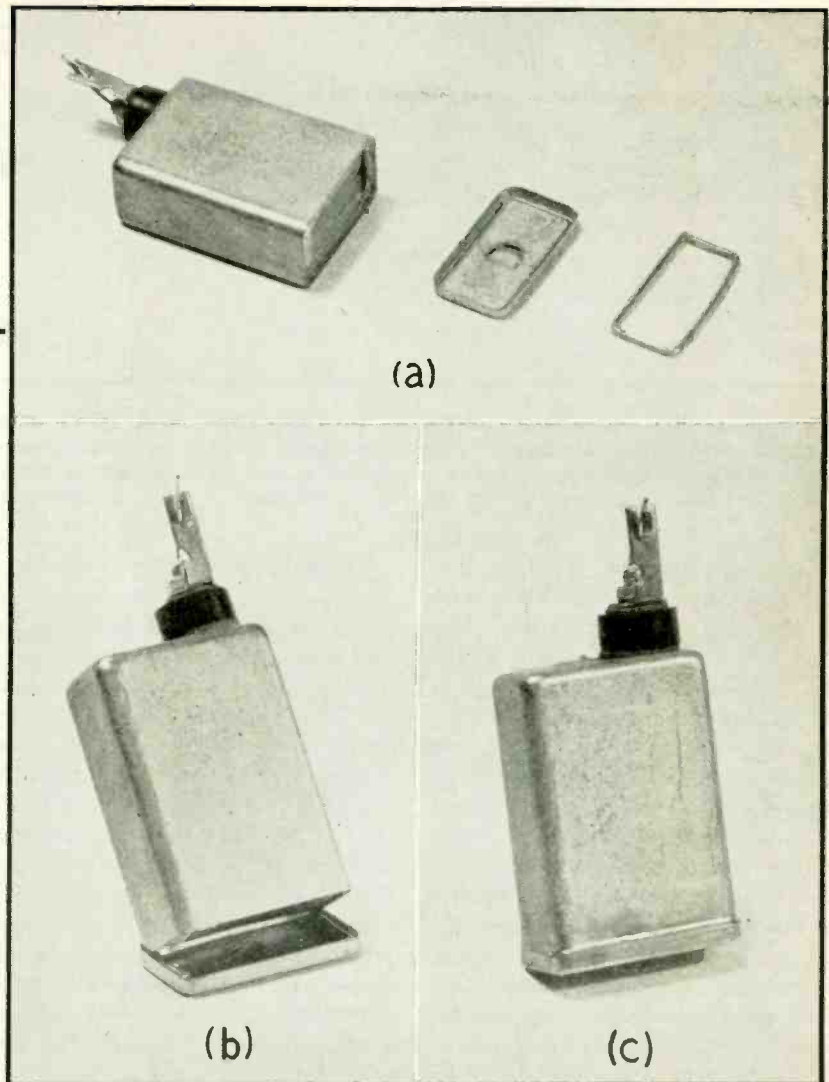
Method of assembling capacitor cans: (a) left to right: the can proper, bottom piece and solder ring before assembly, (b) solder ring in bottom piece and top about to be placed, (c) completed can after soldering
